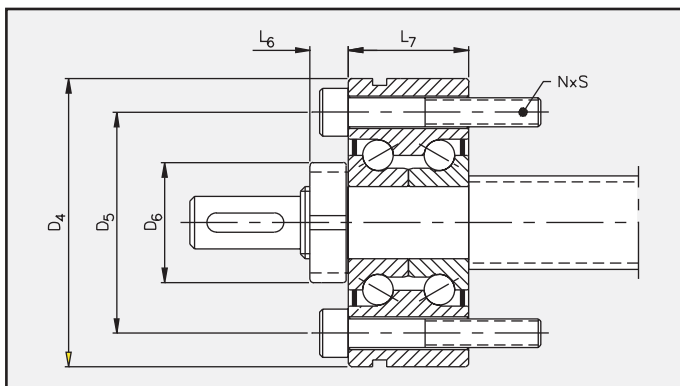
• Standard Screw End - Form D With ZKLF & ZM
